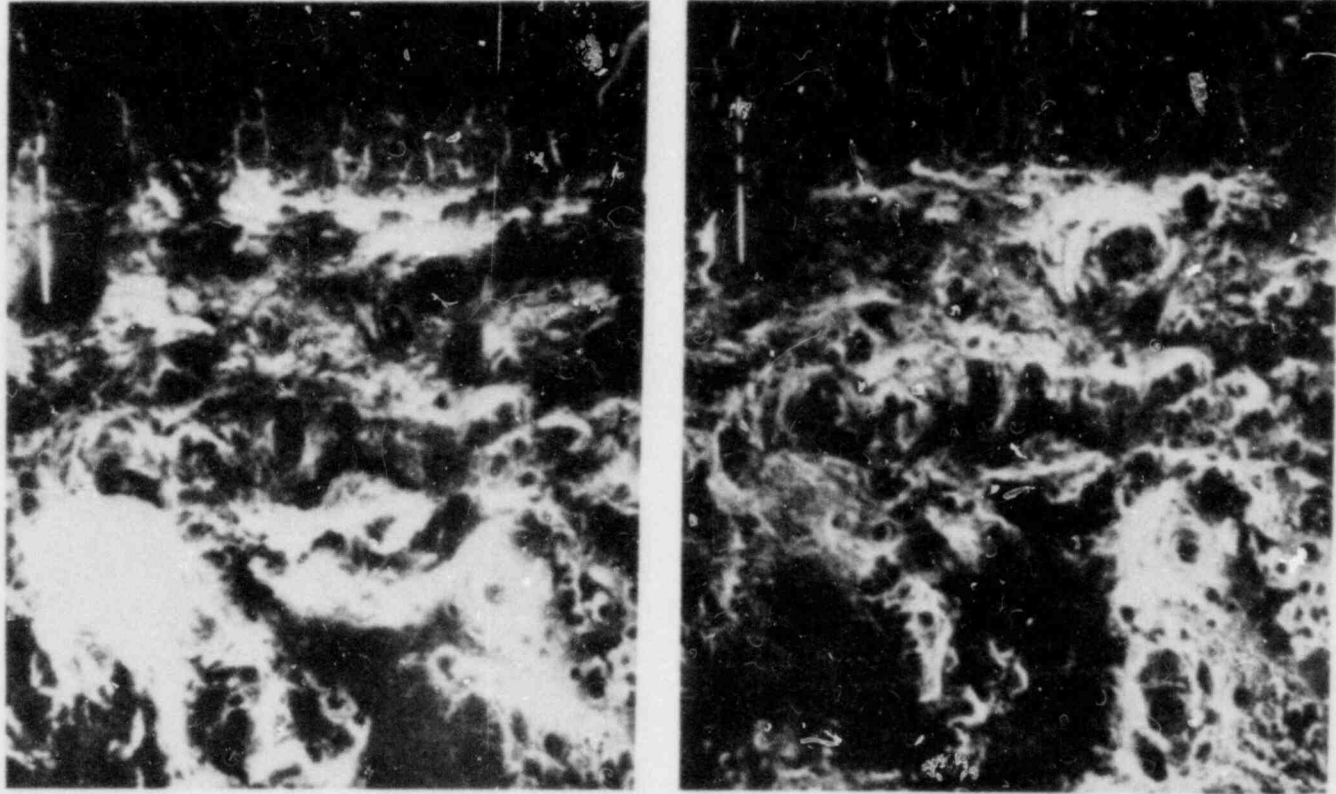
A pair of stereophotographs of lower fracture surface L.
